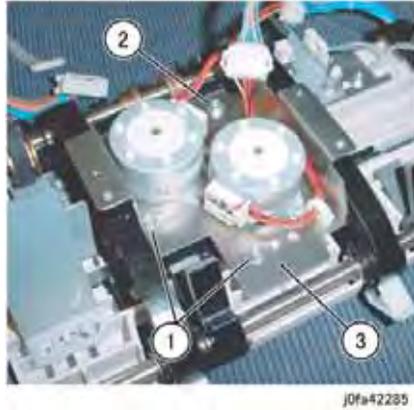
Removing the Front/Rear Tamper Motor Assembly
